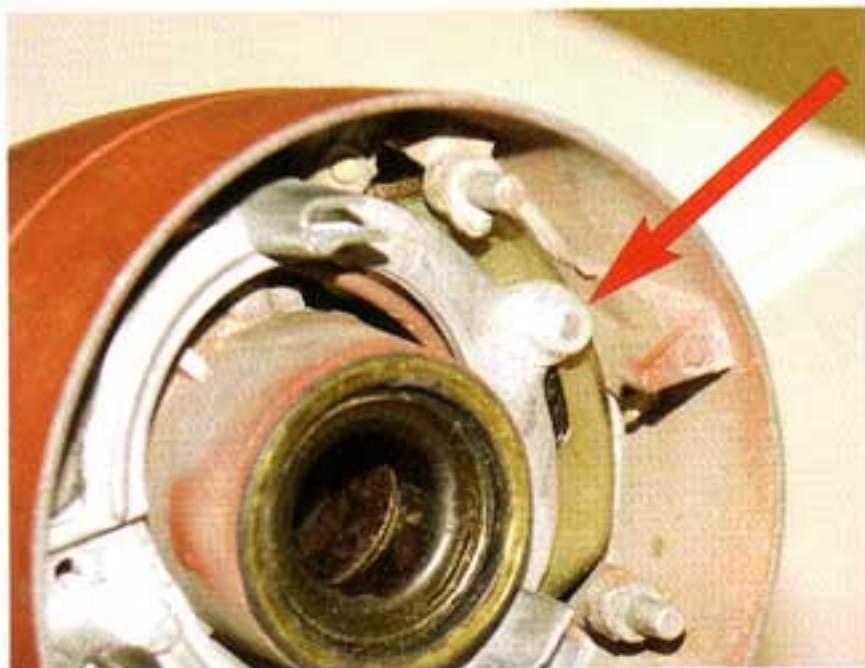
There is a clear nylon roller included in the kit that fits onto the pin on the right hand side of the actuating ring. This will allow the detent spring to slide smoothly making for easy turn signal lever operation.
